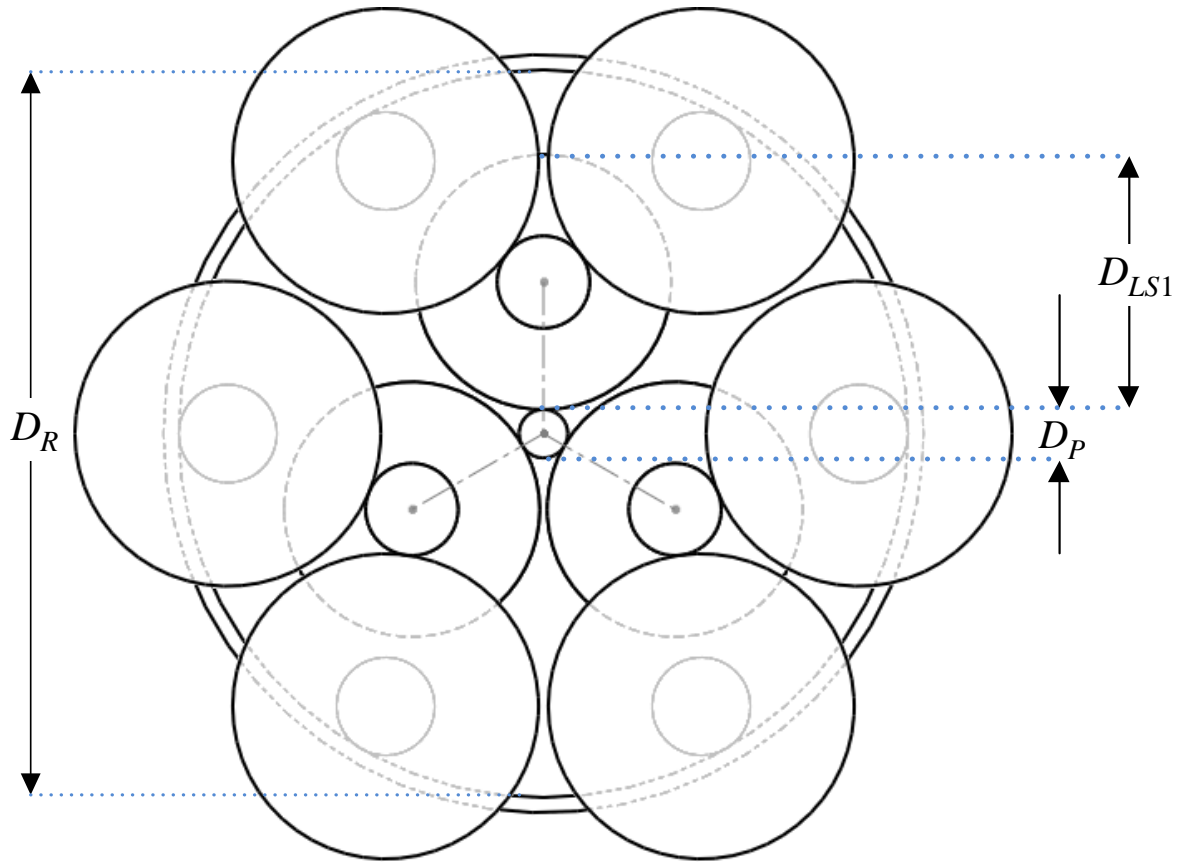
Sketch showing all of the gears in a P-Type 2-Stage SCGT
